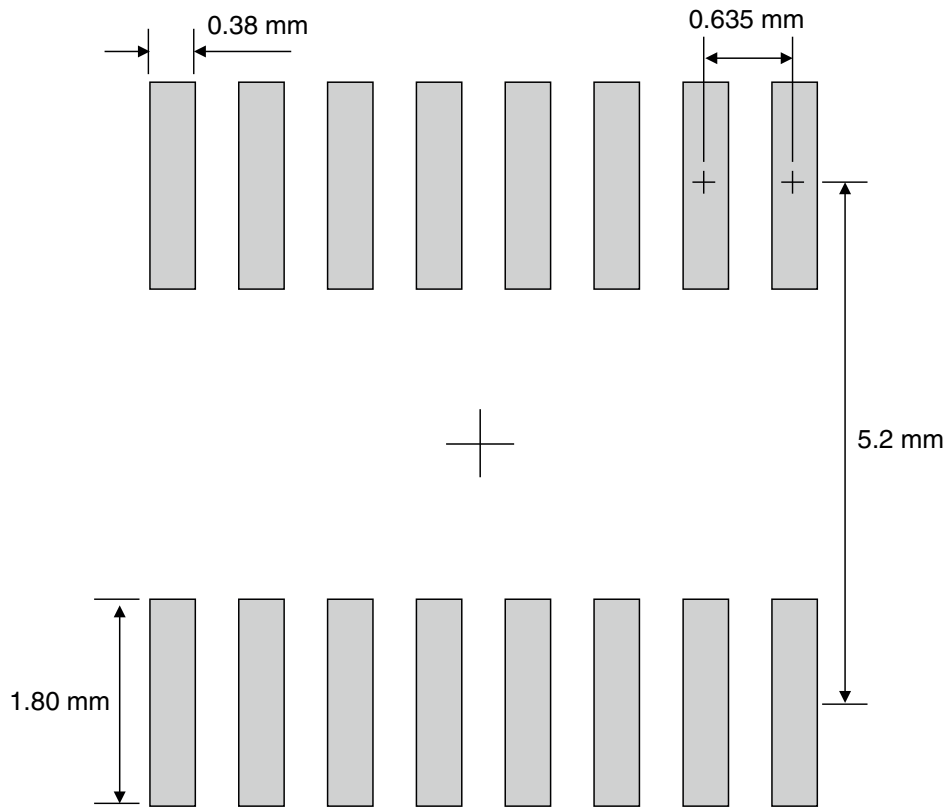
Pad size recommendation for SSOP16 Package (all dimensions in mm)
